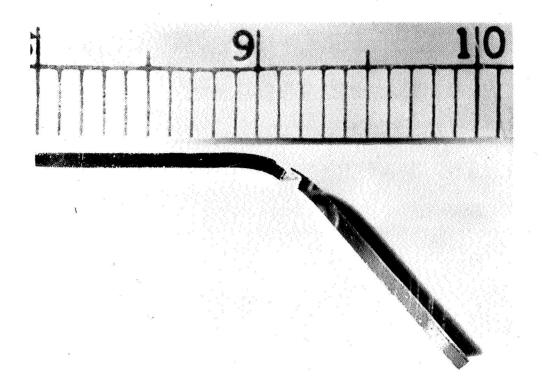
Macrophotograph of Bend Test Sample 7M-B.
